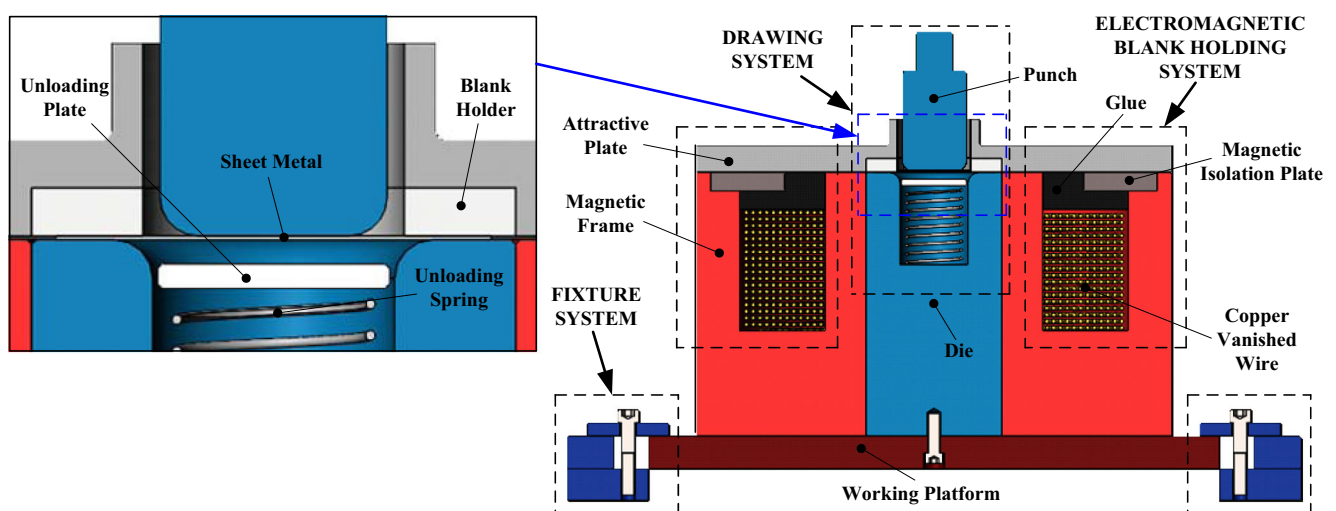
Schematic of the assembly of EBHD and sheet metal drawing system
